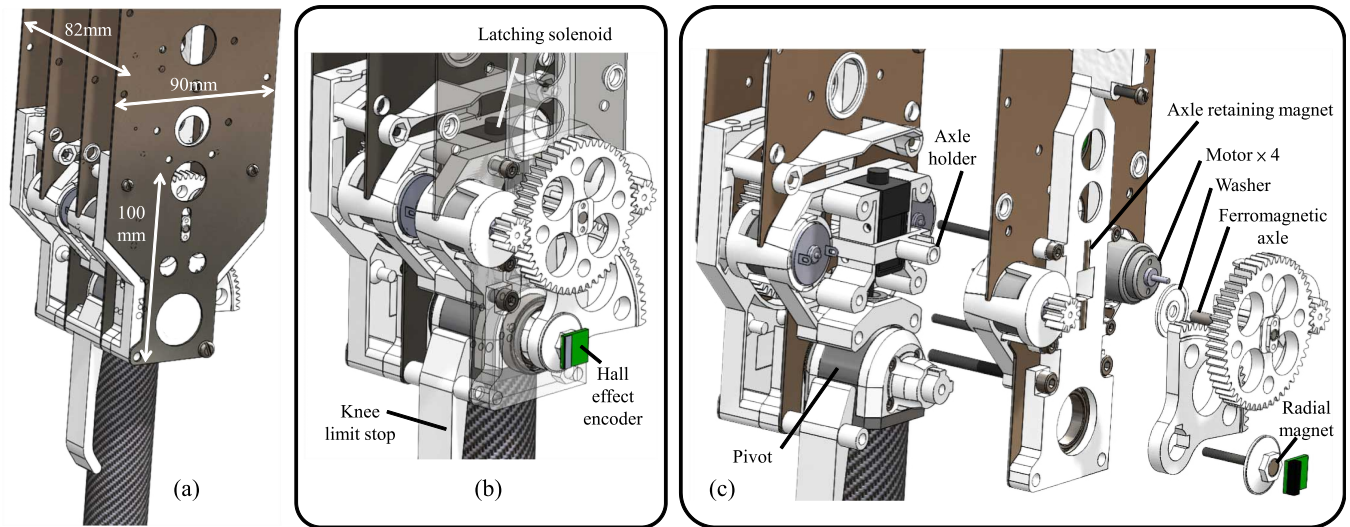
Knee joint mechanism. Mass is 470g excluding chassis components. a) Overview. b) Cutaway view without side sheetmetal. c) Exploded view of left half, revealing axle holder, which can translate vertically about the latching solenoid in the inner core. Mechanism is symmetrical about sagittal plane.
